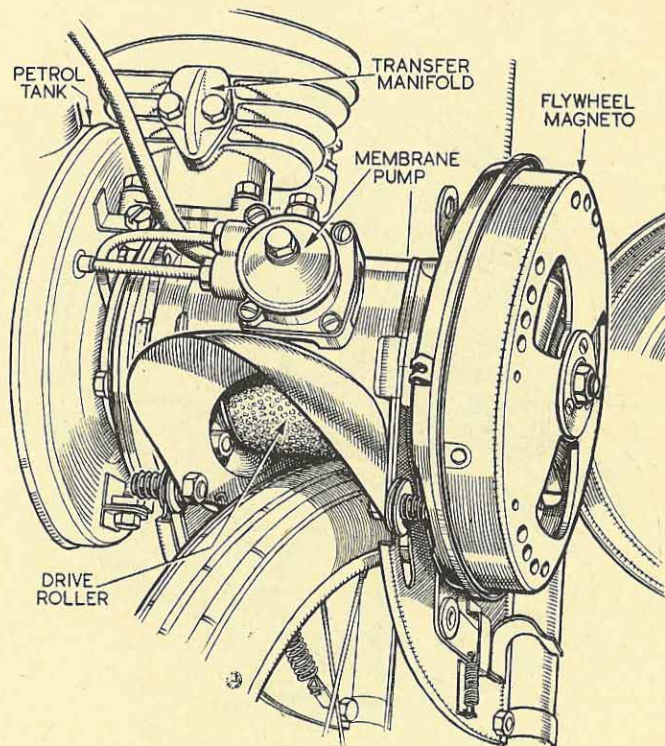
Although the engine is only of 45 c.c. and drives the front wheel by an emery-faced roller, the VeloSolex is not a cyclemotor for attachment to bicycles but is sold as a complete machine. The frame is of open-type and specially constructed. Unusual features of the engine unit are a membrane pump for lifting the petrol from the  $1\frac{3}{4}$ -pint tank mounted on the right of the crankcase (see page 50) and a float-less carburettor, which is illustrated on page 51. The cylinder head is a die-casting in aluminium alloy
